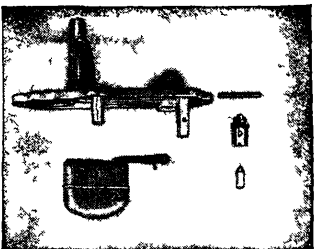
Assemble parts that control gasoline level. Check float for dents and warping. Lip and float pin for wear. Check bowl cover for warpage and wear in countershaft hole. If needed, shape groove on seating surface, replace ball needle and seat
